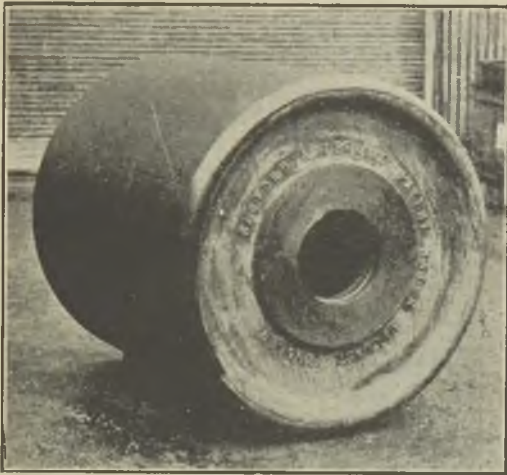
ROLLER FOR MOTOR ROAD ROLLER.
